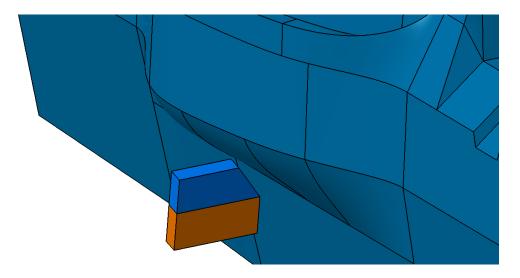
Division between inverter radiator and motor radiator in the optimized configuration
